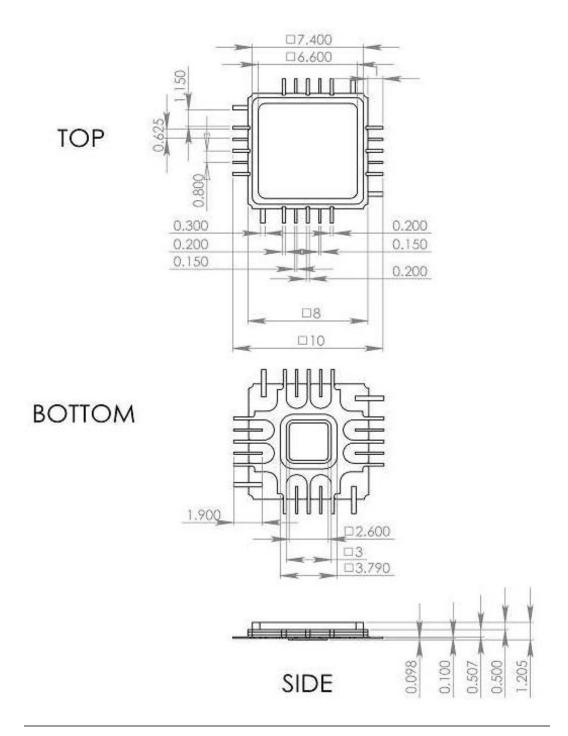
CQFP 24-Pin Package Drawing (All Dimensions in mm)
